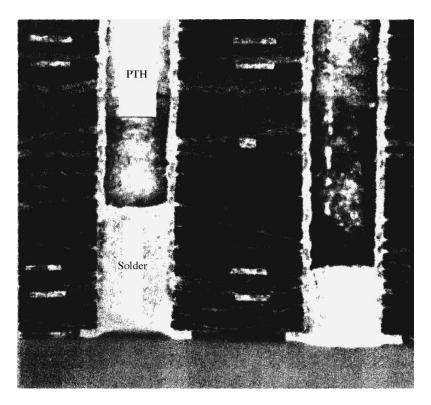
3 Cross-Sectional Image of Through Holes Plated with Cu And Immersion Sn.
